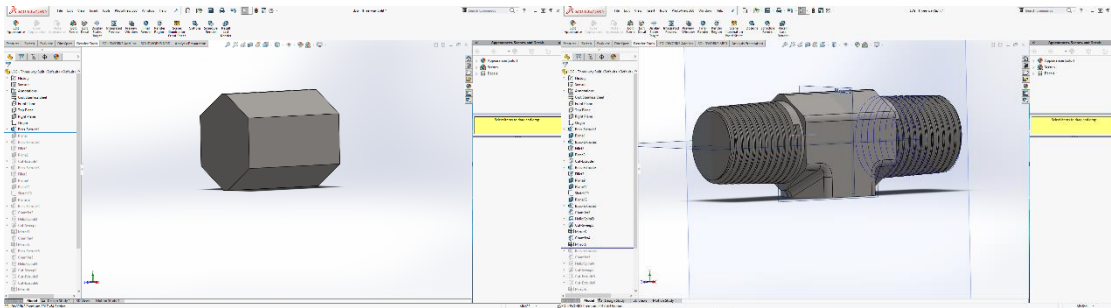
AAA080808: CAD Drawing (Stages 1 & 2)
